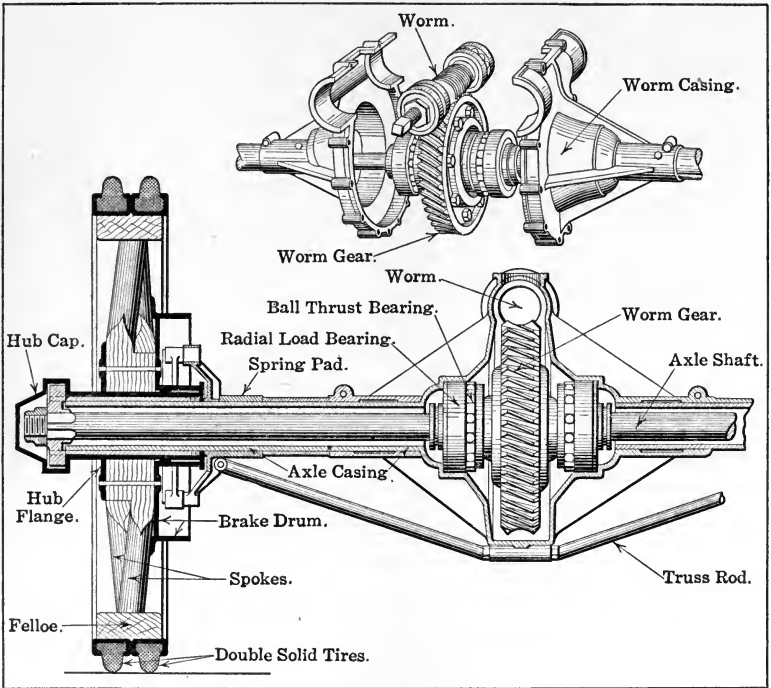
Worm-Gear Driving Axle Used on Dennis (English) Motor Cars.
